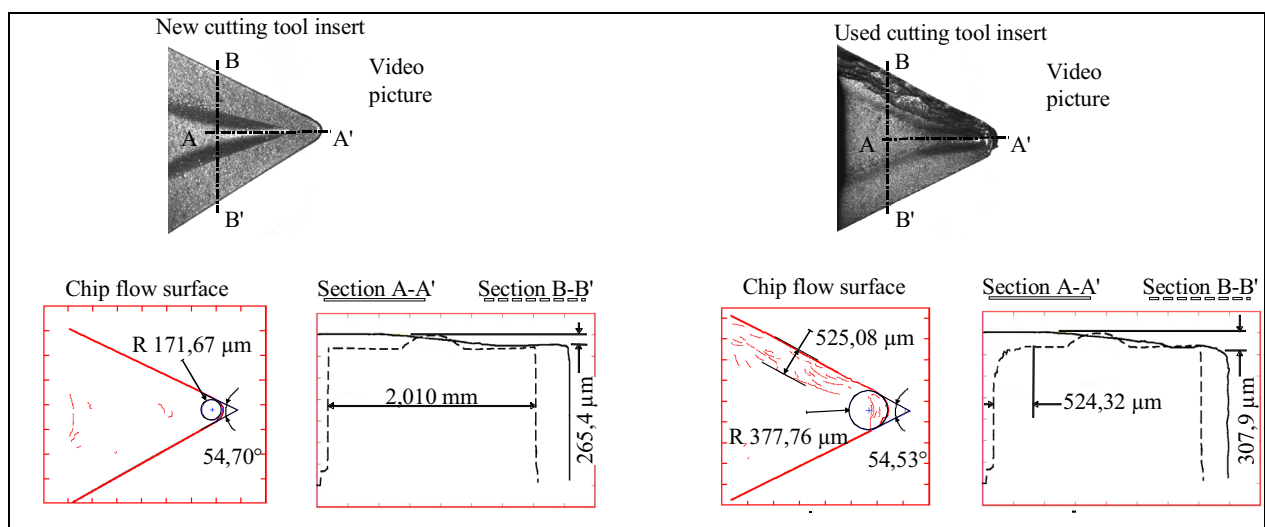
WEAR MONITORING ON CUTTING TOOL INSERTS
